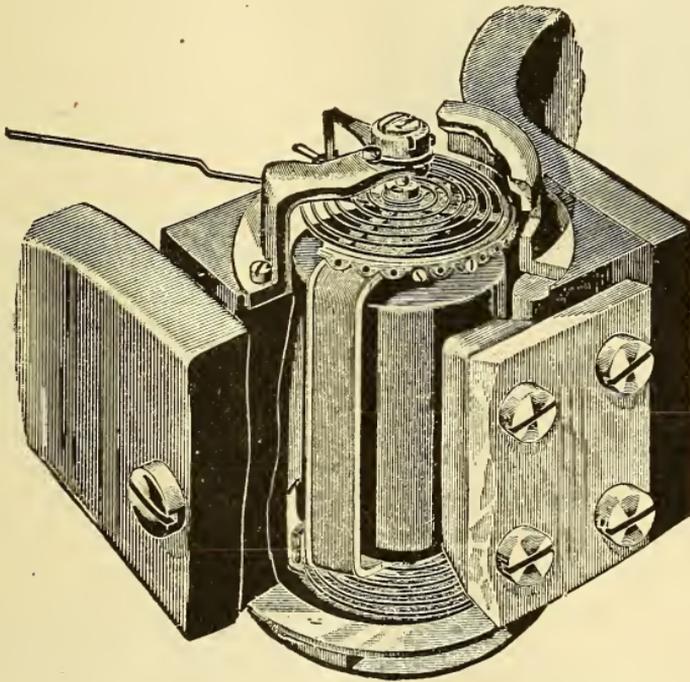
Method of Mounting Movable Coil in Weston Instruments.
